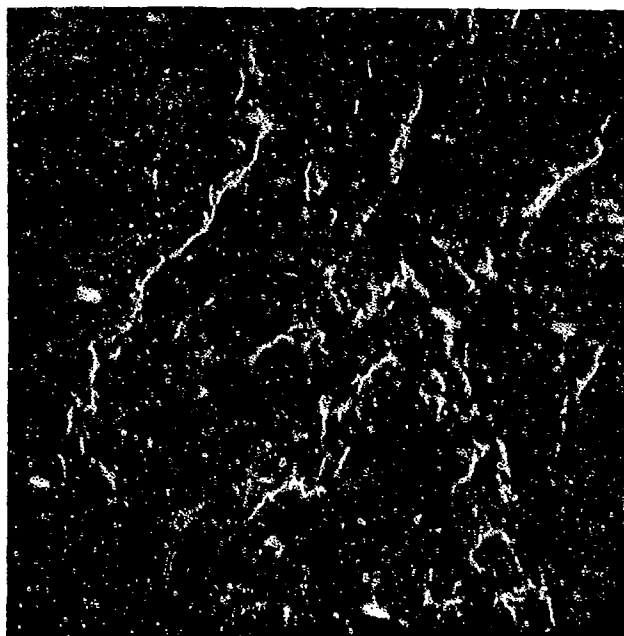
Fatigue striations on fracture surface of temper-embrittled AX-110 weld fatigue specimen, 1500x.
